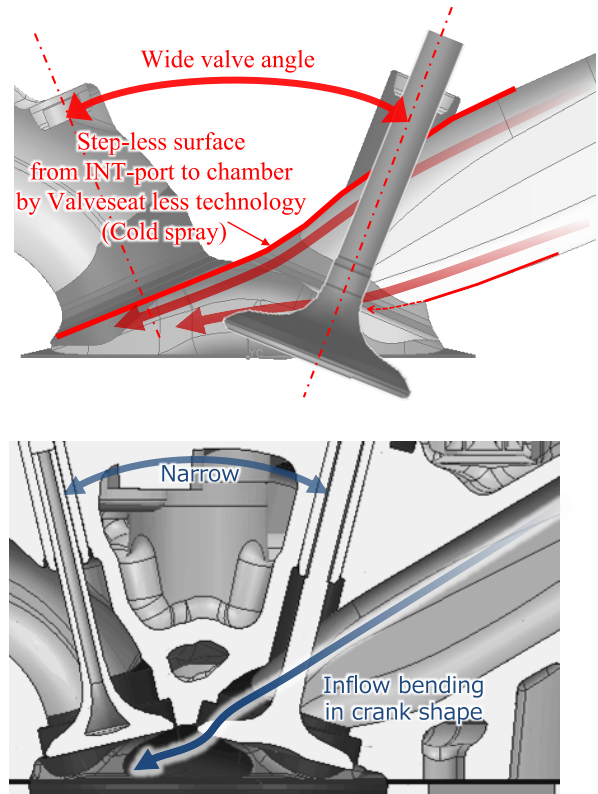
Comparison of design concept of intake port and combustion chamber (New design with cold spray valve seat (left), current design (right))
